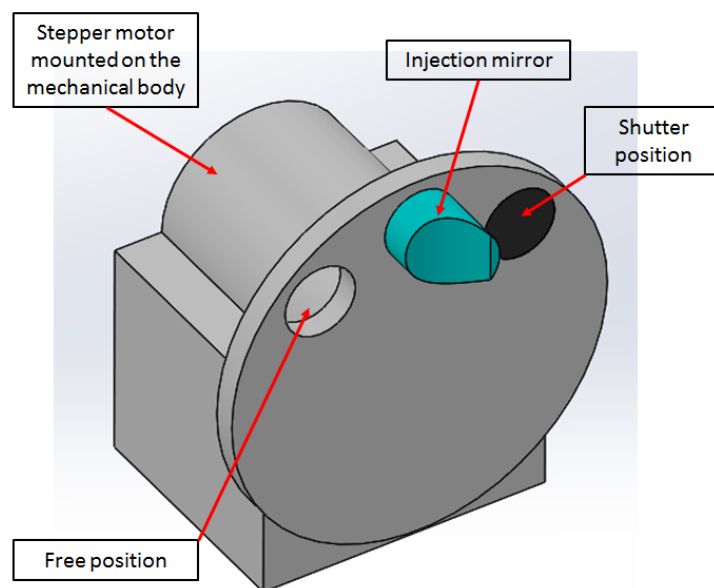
Overview of the Wheel Assembly which is placed inside the injection point box. The design is relatively similar to that of the LWA.
